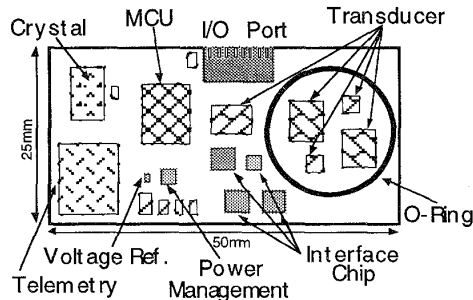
Actual size layout of the printed circuit board version of the system packaging.
